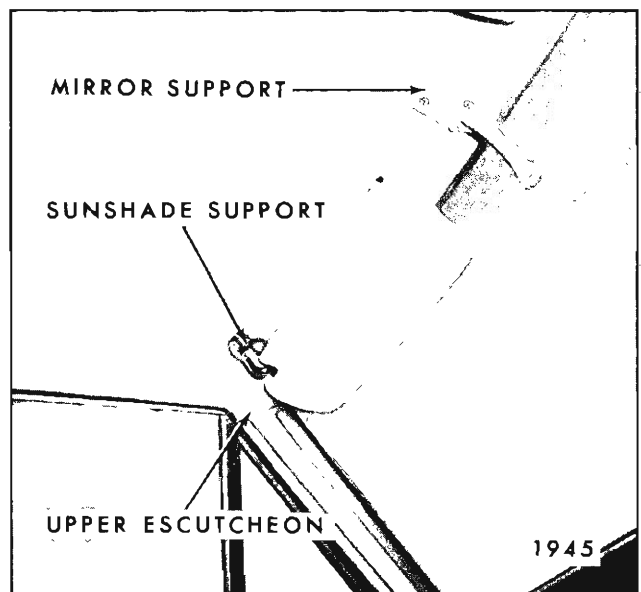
C2—Upper Trim Escutcheon Sunshade Support and Rear View Mirror Support
